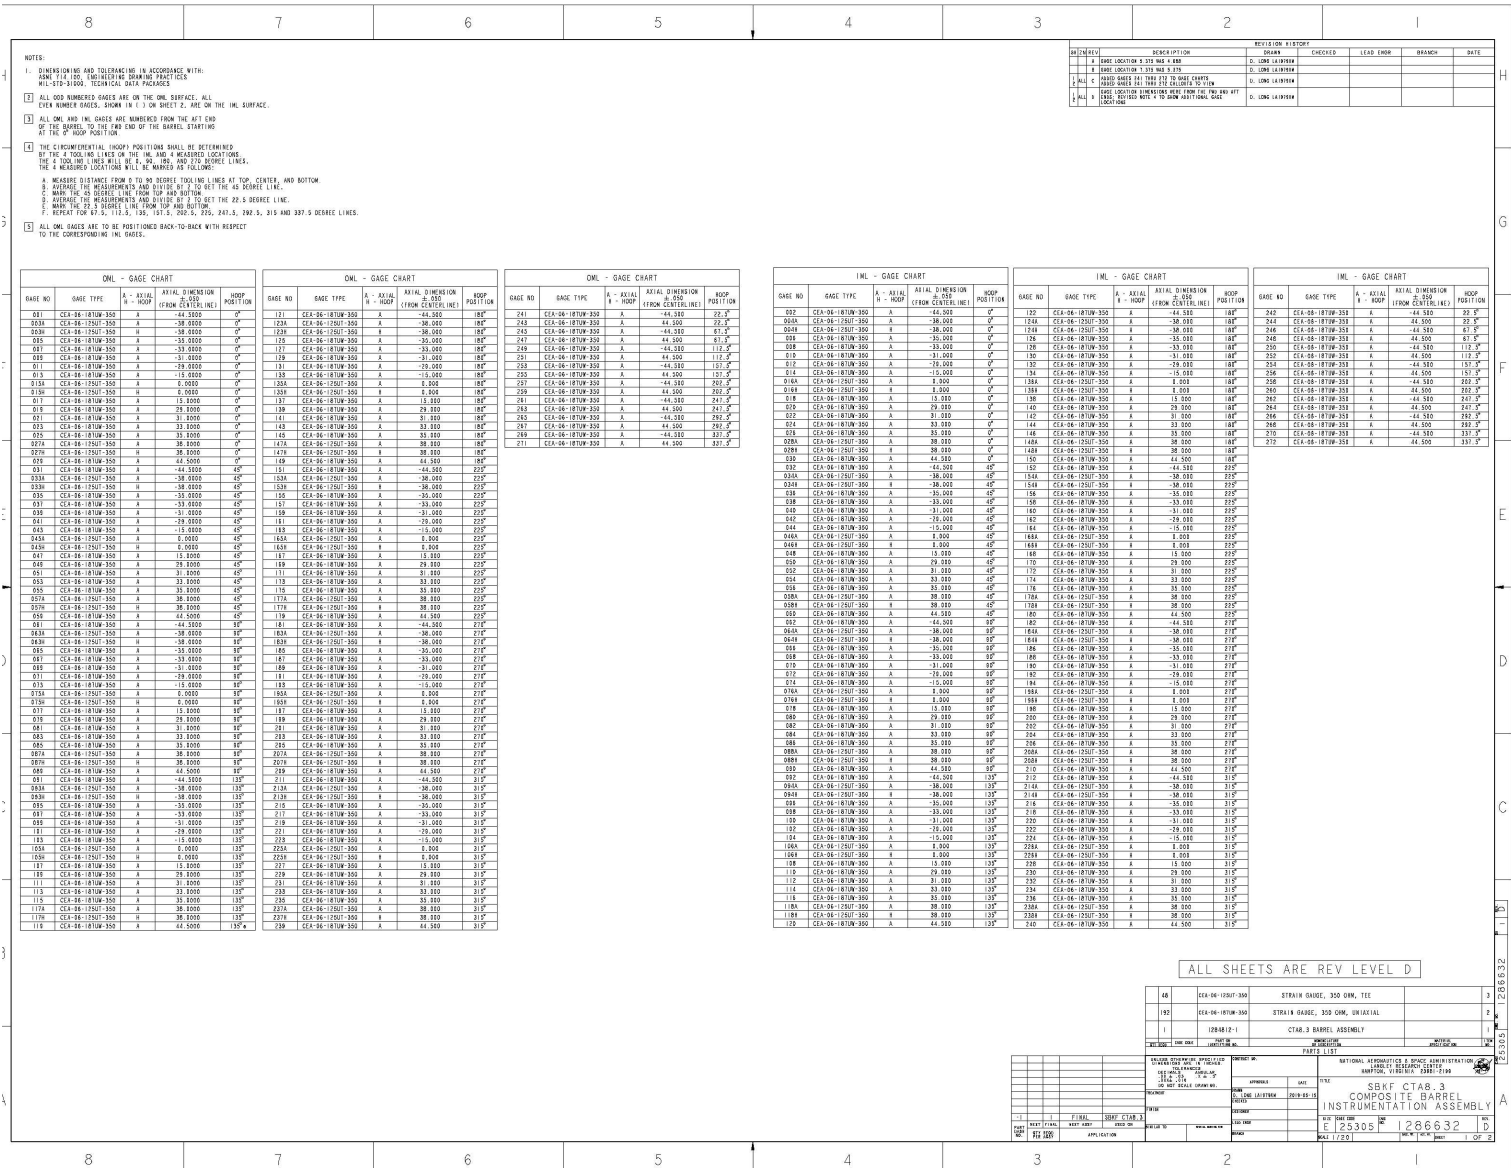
Strain-gage instrumentation drawing, LaRC Drawing 1286632 RevD.
